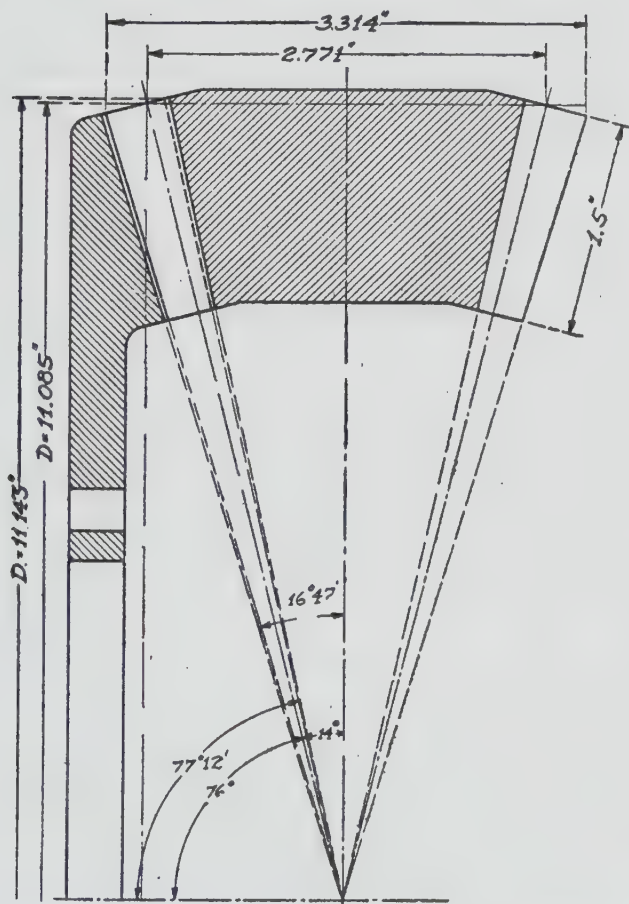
LAY-OUT OF A PAIR OF HELICAL BEVEL GEARS.
